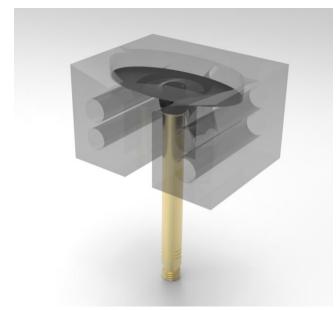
Final 3D CAD model of the tool – valve positioner ("the end of the trail") in comparison with the inner tube valve.
